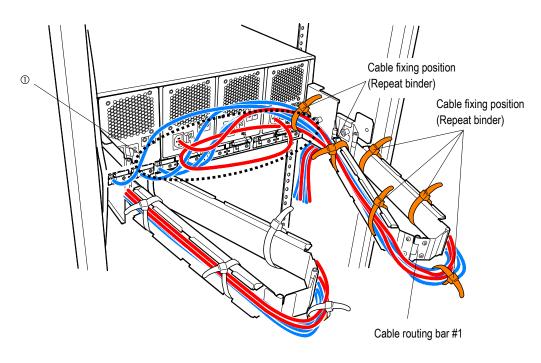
Fixing the ENC Cable #B0, #B1 and Power Cable #B1, #A1 (for Rev.A)
